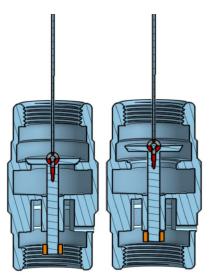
Plate open and plate closed position of valve, where the plate valve is connected to the spring system with a cable that goes through the eyebolt. The limit of plate opening is limited by a nut at the threaded end (as shown by the orange nut).
